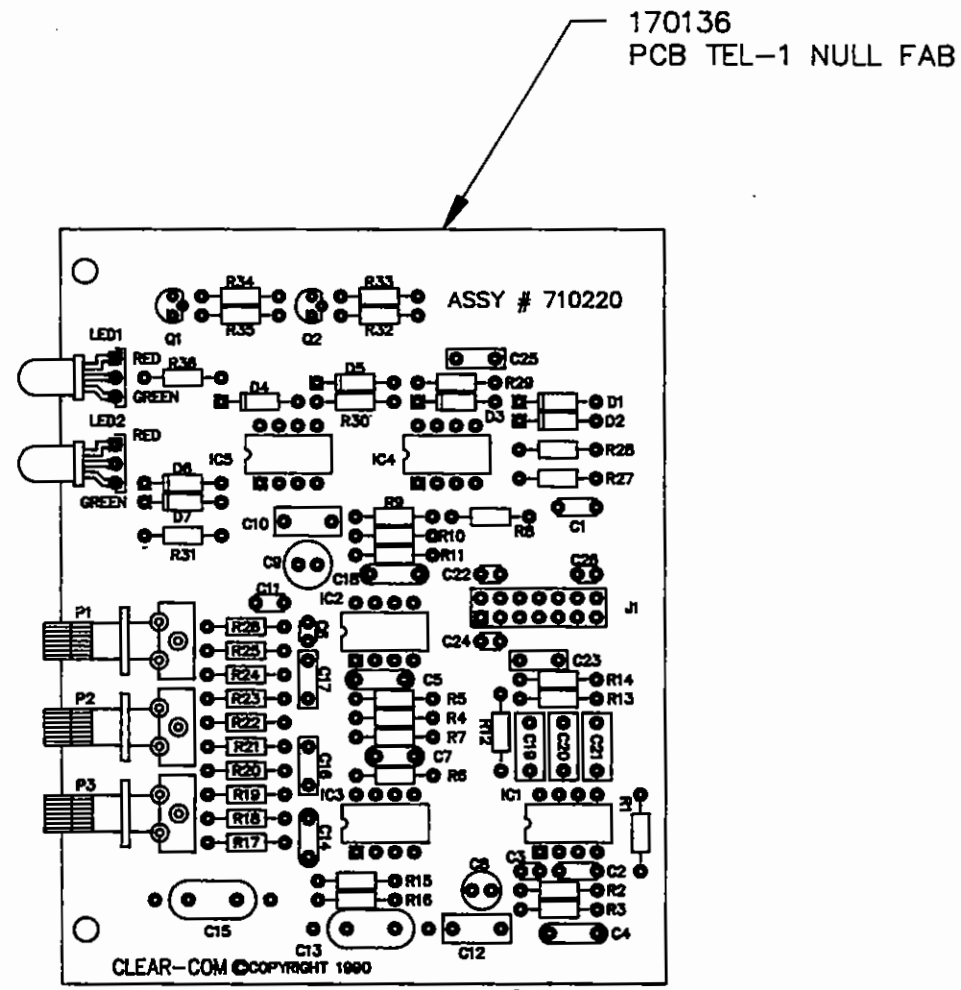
Assembly Drawing - TEL-12 Null Detect PCB, Rev. D
